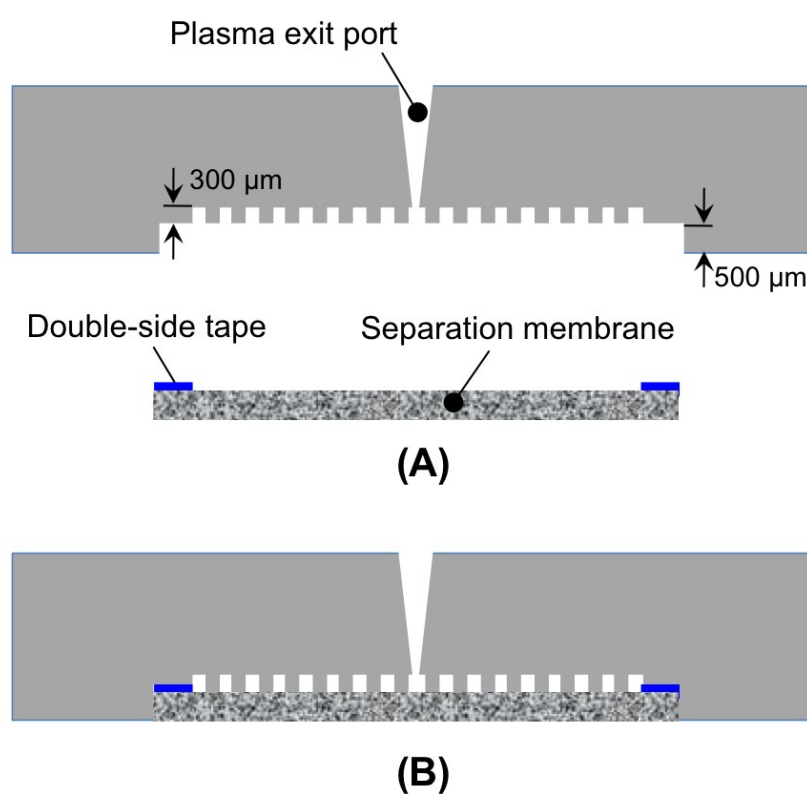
A cross-section illustration of the top cover before (A) and after (B) assembling the separation membrane.
